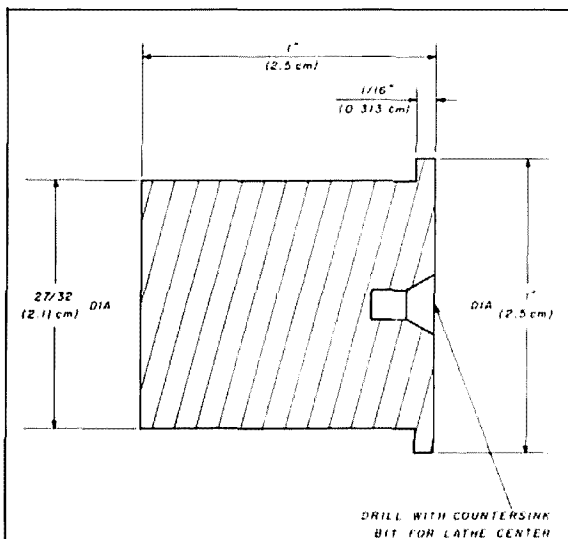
A. The dimensions of the single aluminum plug used to fit into the open end of the 1-inch (2.5-cm) tube and supports the open end in the lathe center while the threaded rod, the brass plug detailed in fig. 3, and the brass tube are silver soldered.
